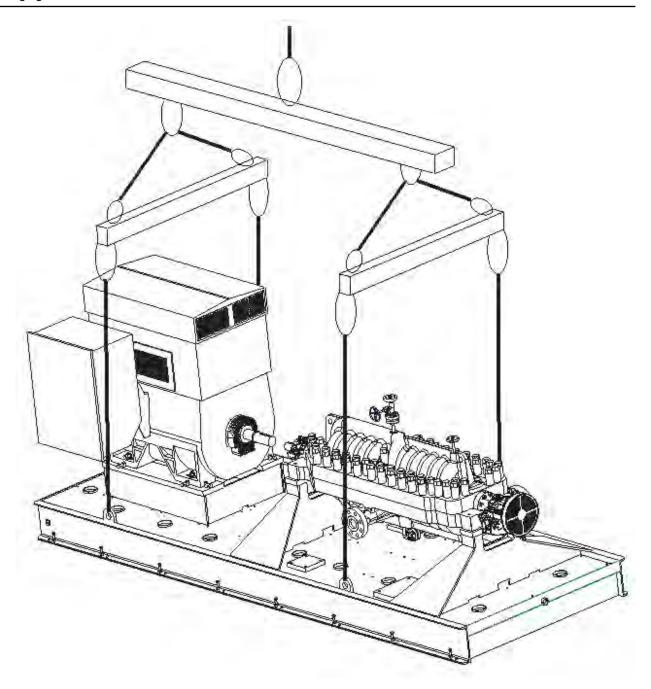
Example of the proper lifting method for baseplate-mounted units with a driver
